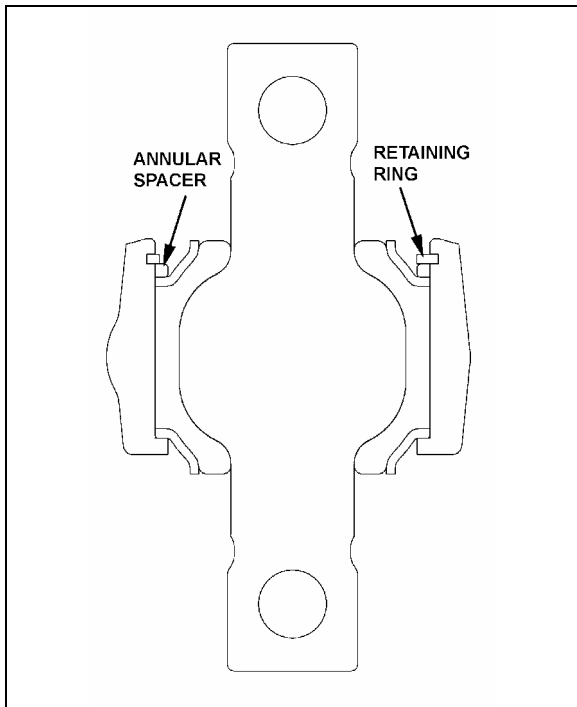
LOWER A-ARM BALL JOINTS 16114
